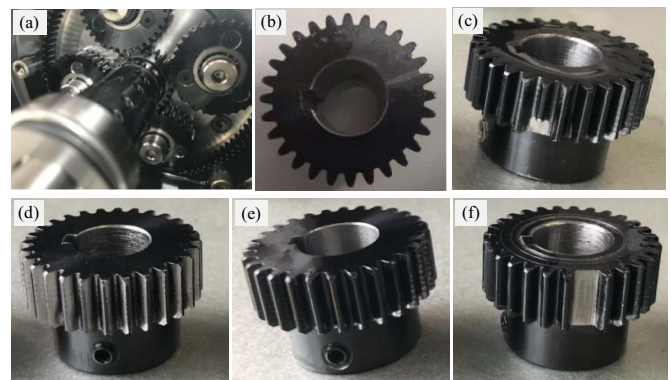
(a) Internal structure of planetary gearbox. (b) Healthy condition, (c) gear with a broken tooth, (d) wear gear, (e) crack occurs in the root, and (f) missing one tooth.
